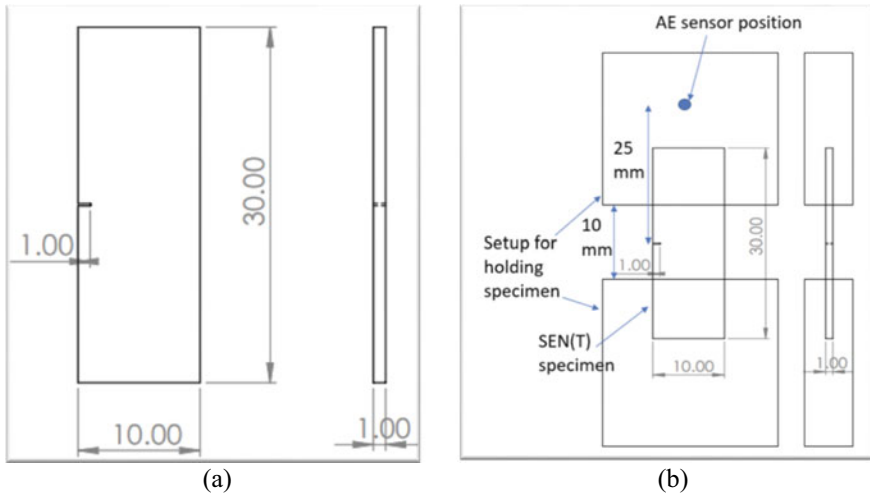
a Dimension of specimen b Setup to hold the specimen and AE sensor position (all dimension are in mm)
